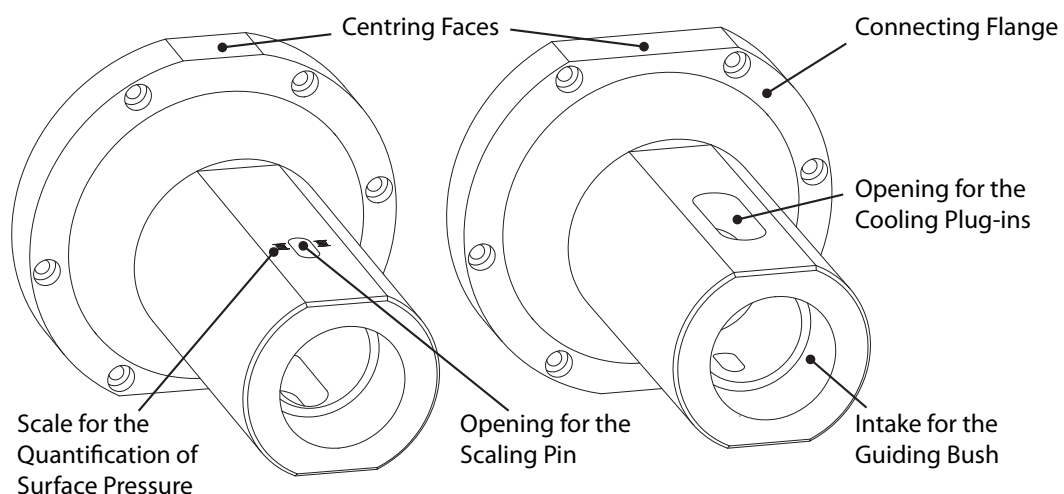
Detail: Housing - for a detailed drawing see Appendix B-B4/B6
